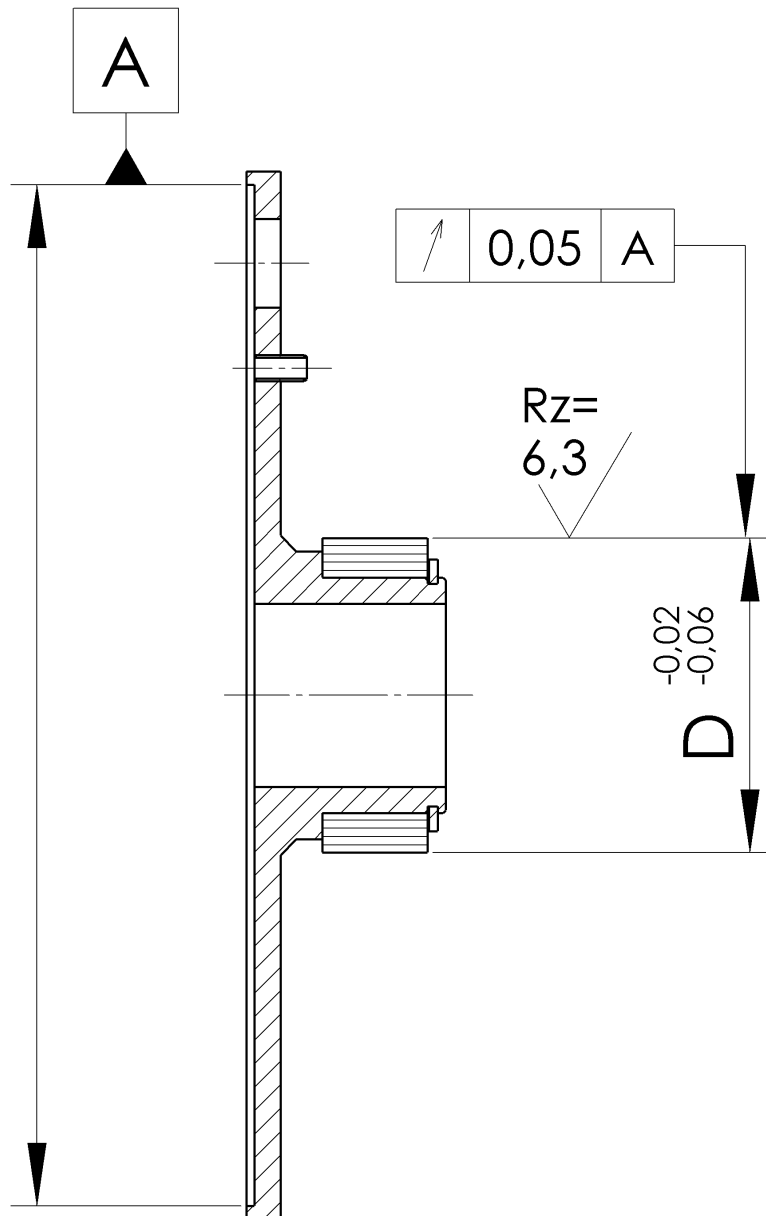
Fitting the Textar-bearing (design GZ)
